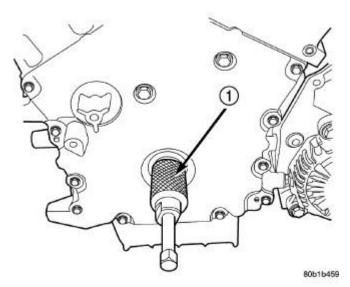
Crankshaft Front Oil Seal - Removal Courtesy of CHRYSLER LLC
